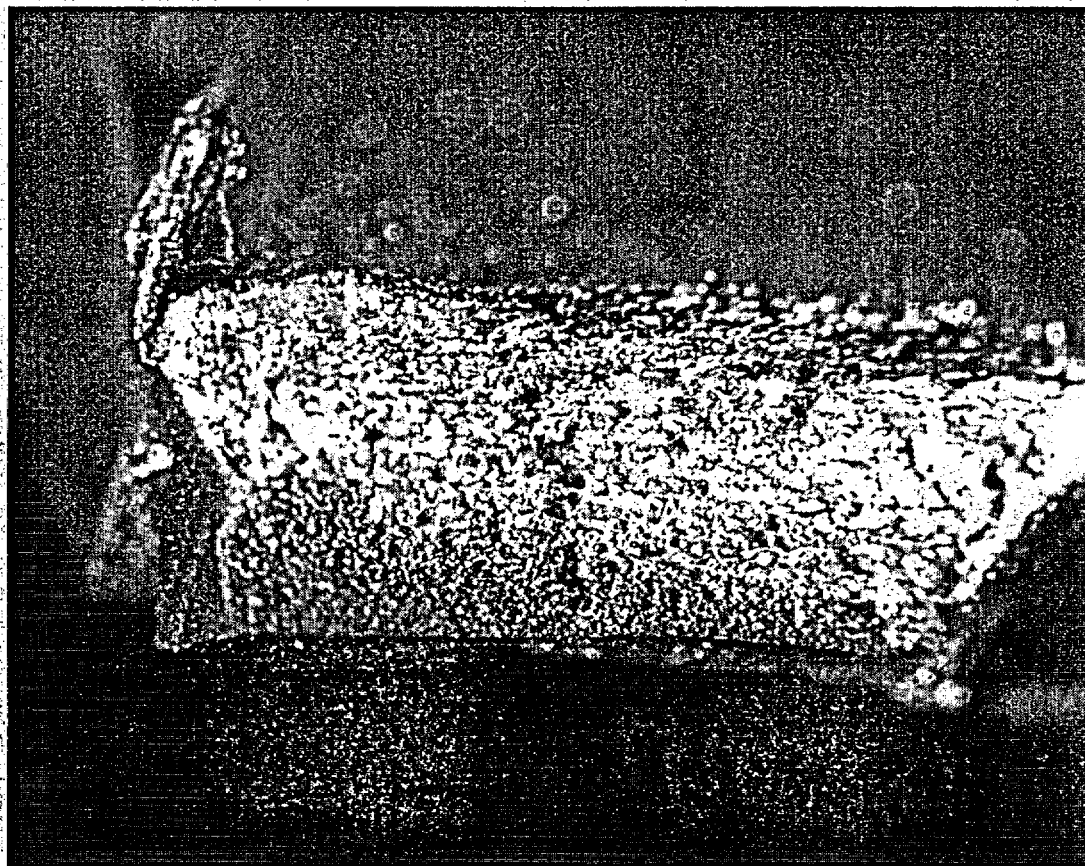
CW fracture surface of upper half of section through crack at 25° on R44C45 in 2H TSP.
